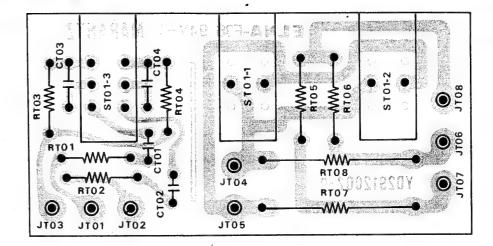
Speaker Loudness Assembly PT01 Component Locations
